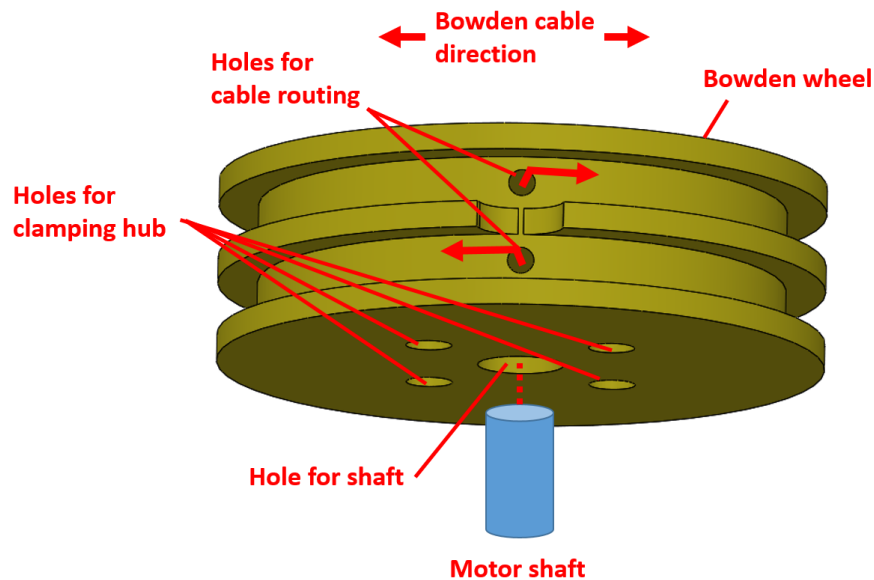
Bowden cable direction of movement on motor wheel
